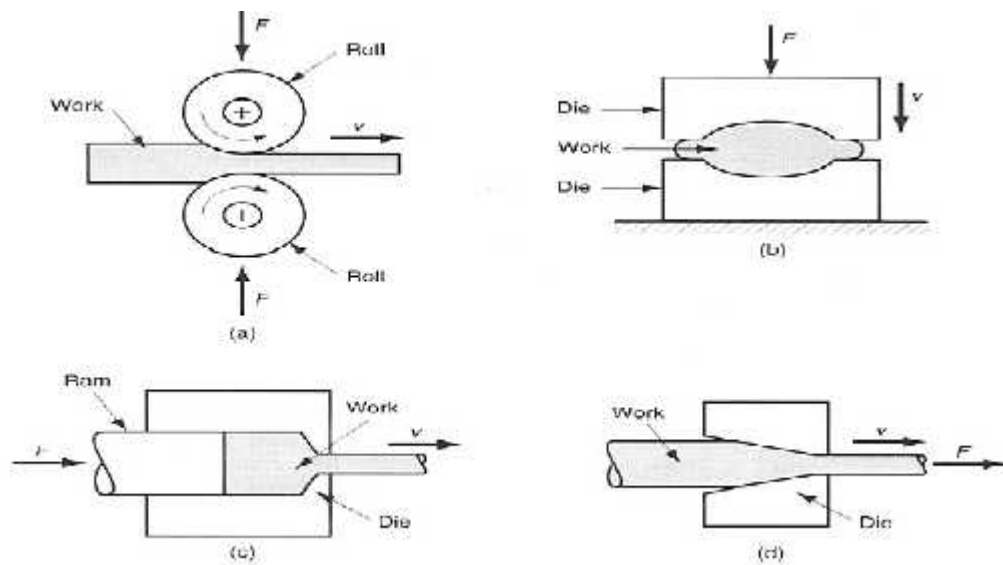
(a) rolling, (b) forging, (c) extrusion, (d) drawing
